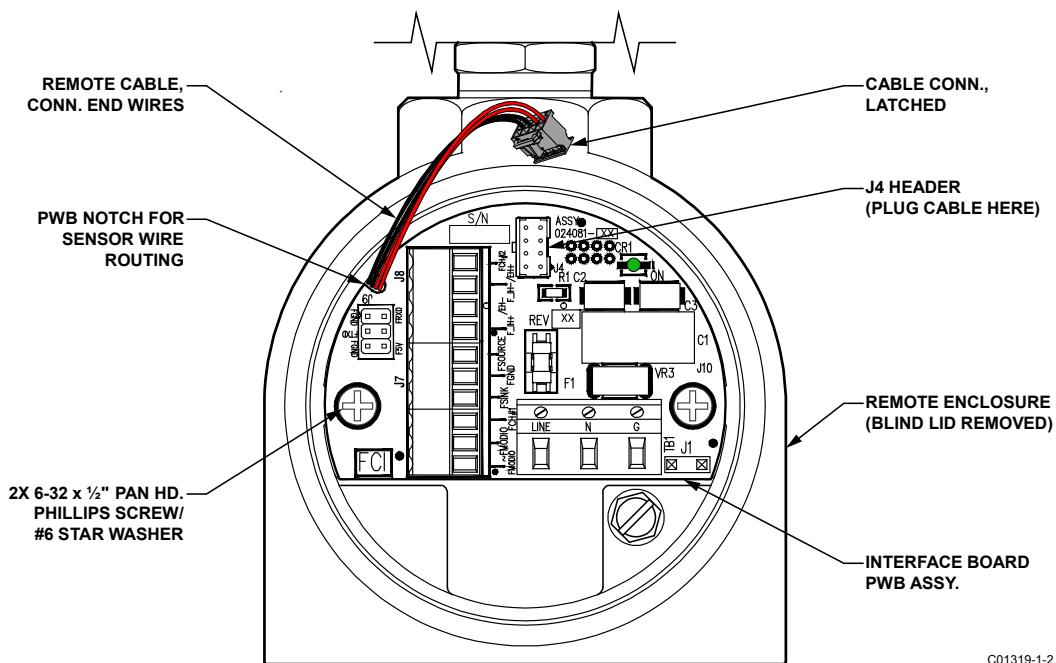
Remote Enclosure Interface Board Connector J4 Detail (AC Version Shown)
